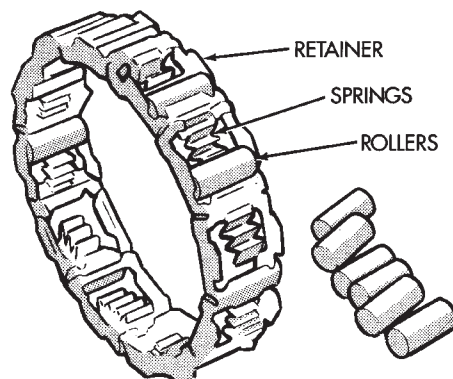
Installing Overrunning Clutch Rollers In Retainer
